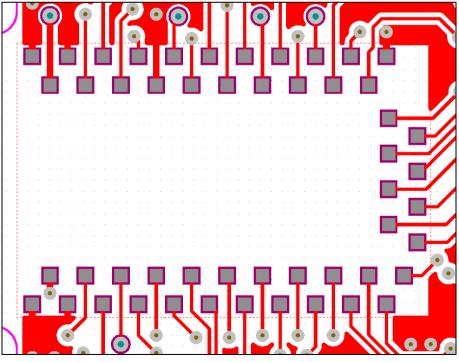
Exemplary base board footprint for 22M00 / 23M00 (top view)
